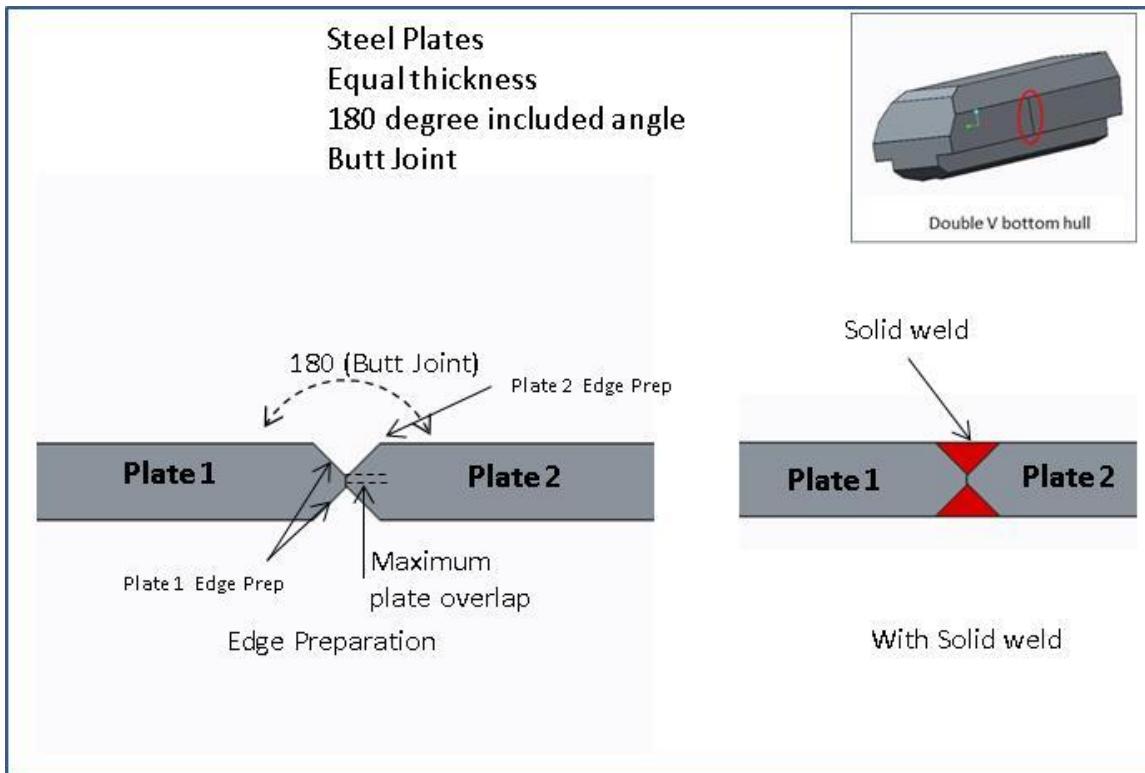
Edge Prep and Solid Weld Example 3
